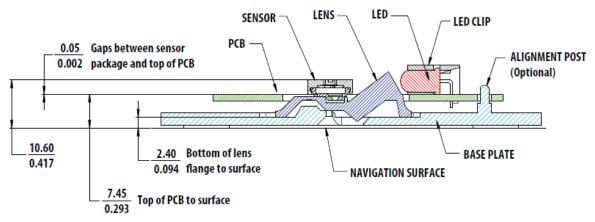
Recommended PCB Mechanical Cutouts and Spacing
